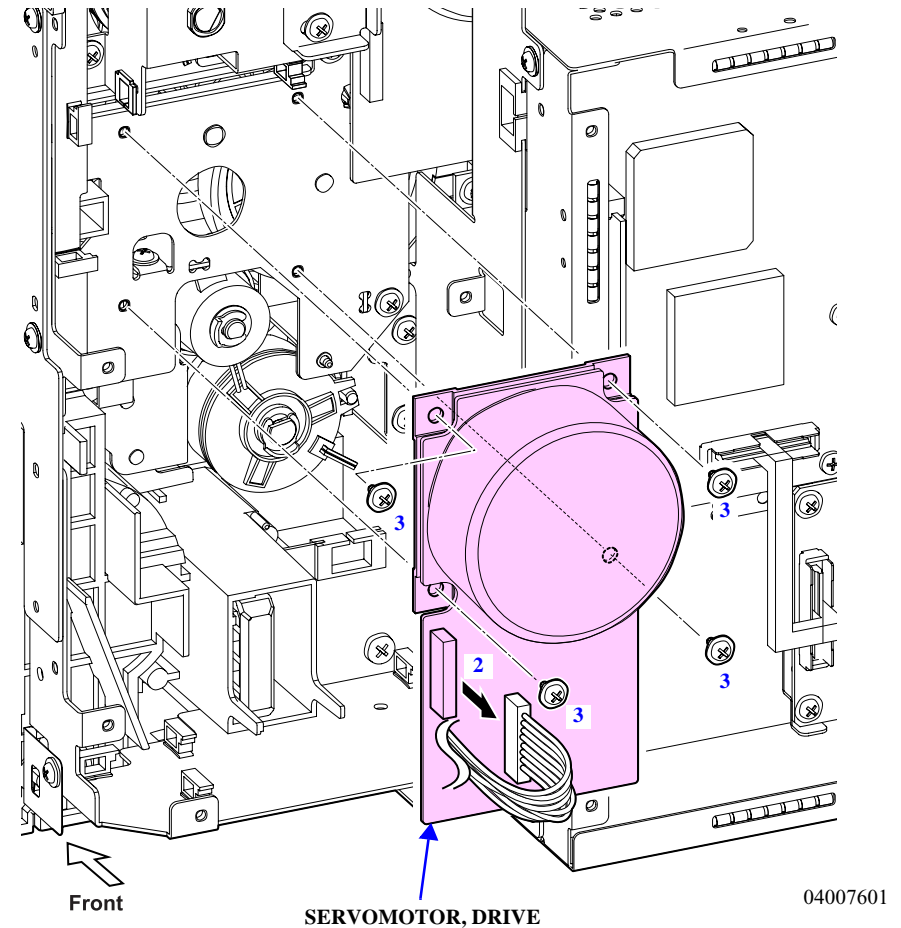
Removal of SERVOMOTOR, DRIVE
